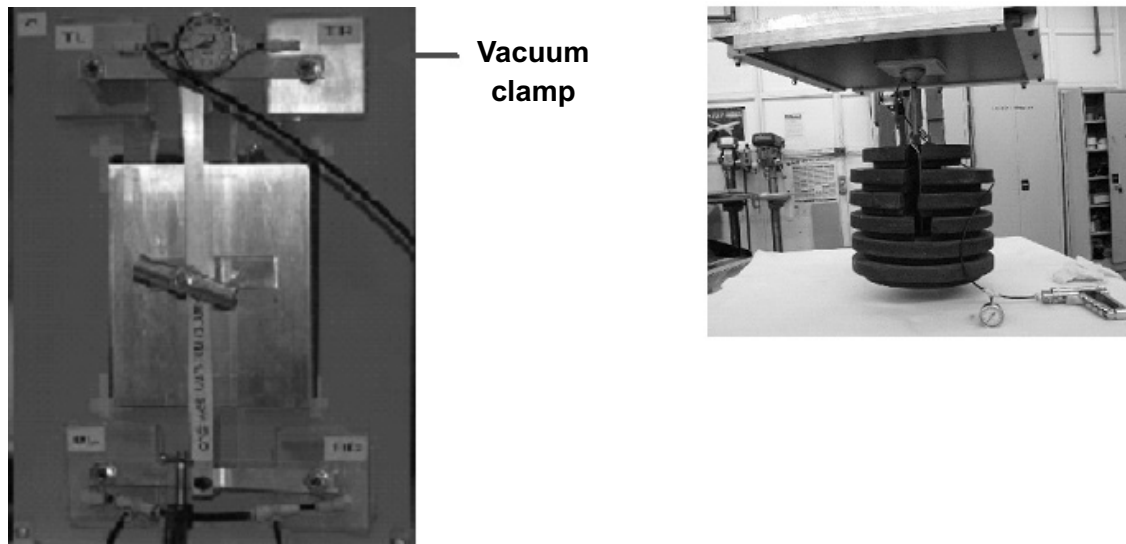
Left: a mechanical clamping jig to apply pressure to a repair patch. The pressure is applied by clamping an aluminium plate onto a layer of silicone rubber that covers the patch. The jig is attached to the structure by using vacuum pressure through four 'vacuum clamps'; Right: a pull out test to examine the loading capacity of the vacuum clamp.
